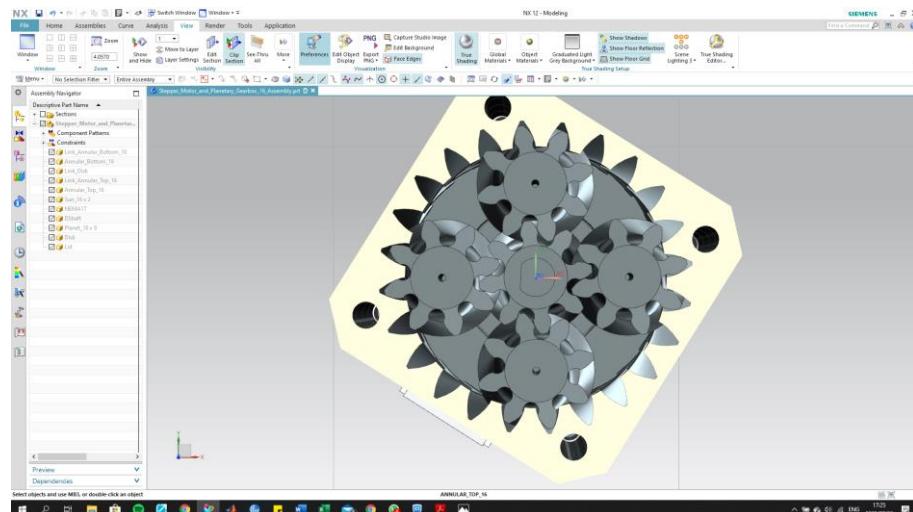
Top Full-Cut View of 1:16 Gearbox with 4 Planet Gears
